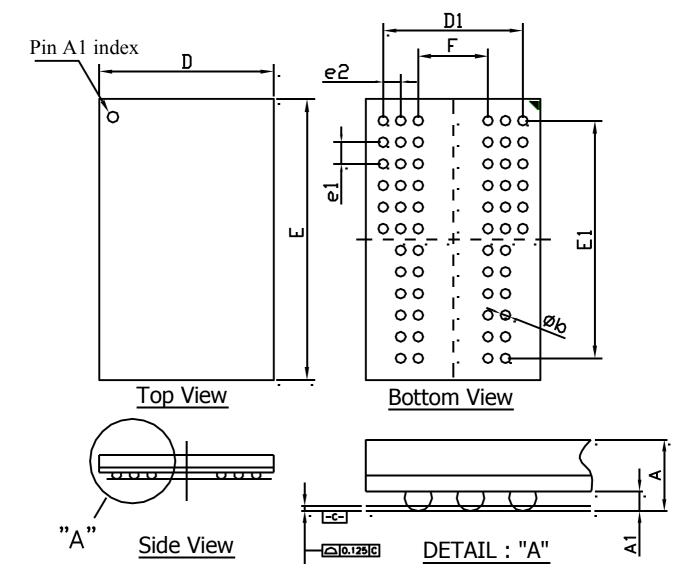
TFBGA 60ball 8x13x1.2mm(max) package Outline Drawing Information:
